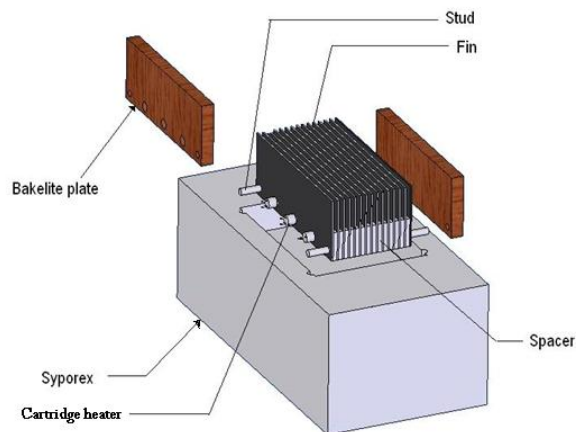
Fin array assembly is mounted inside the cavity Of symporex block
